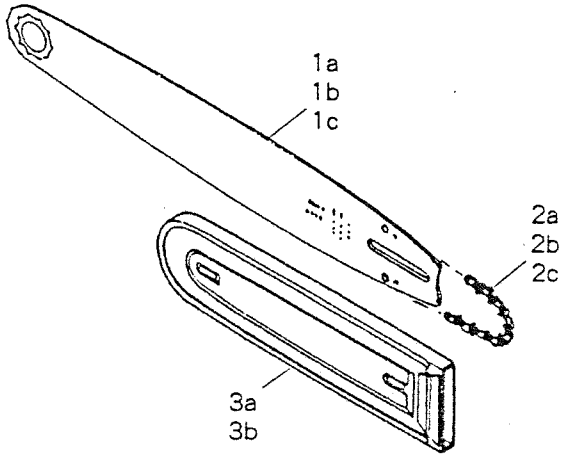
GUIDE BAR, SAW CHAIN, TOOLS
